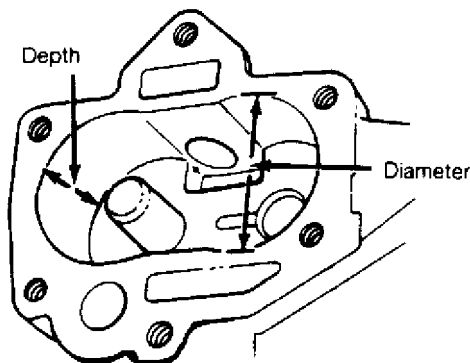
Measuring Oil Pump Gear Cavity - Typical
